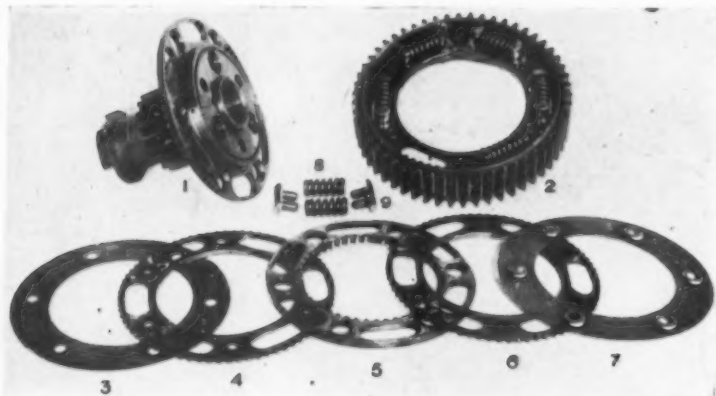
Details of Mercedes-Benz D.B. 601A spring drive pinion and spur wheels.
